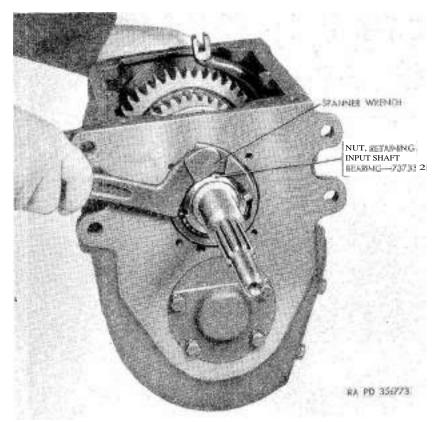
Removing input shaft bearing retaining nut with spanner wrench.
